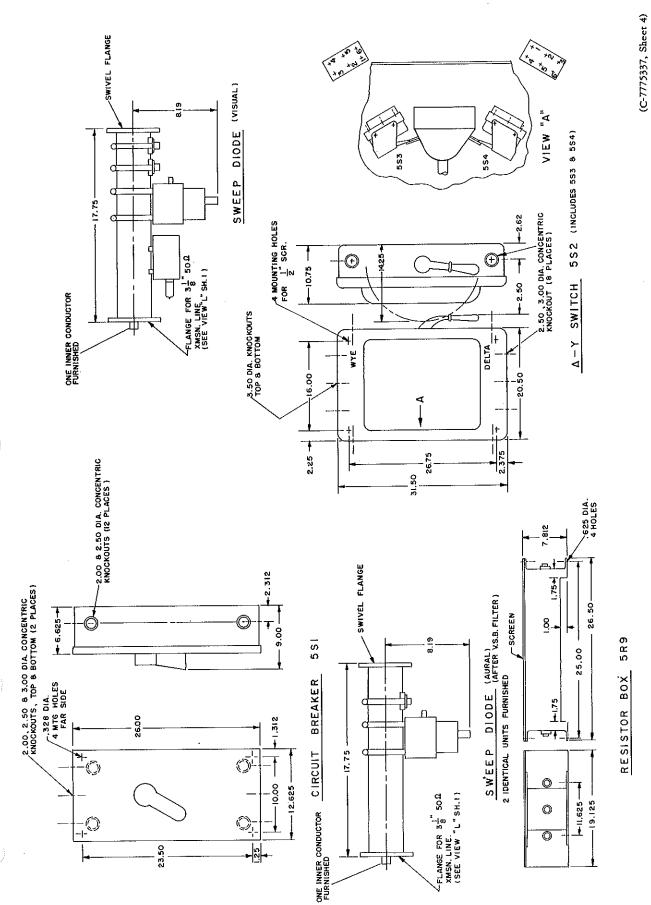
Outline Drawing: Circuit Breaker (581), Sweep Diodes, Resistor Box, Delta-Wye Switch
